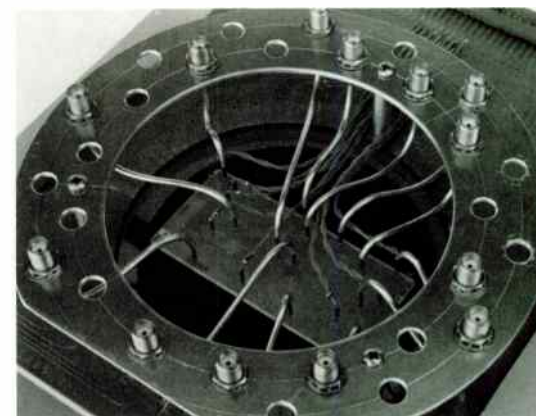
Hybrid Circuit Probe Card With Spring-Loaded Probes.
